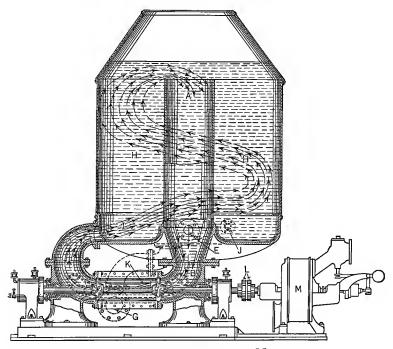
WINESTOCK DEFIBERING MACHINE Courtesy of Castle, Gottheil & Overton
